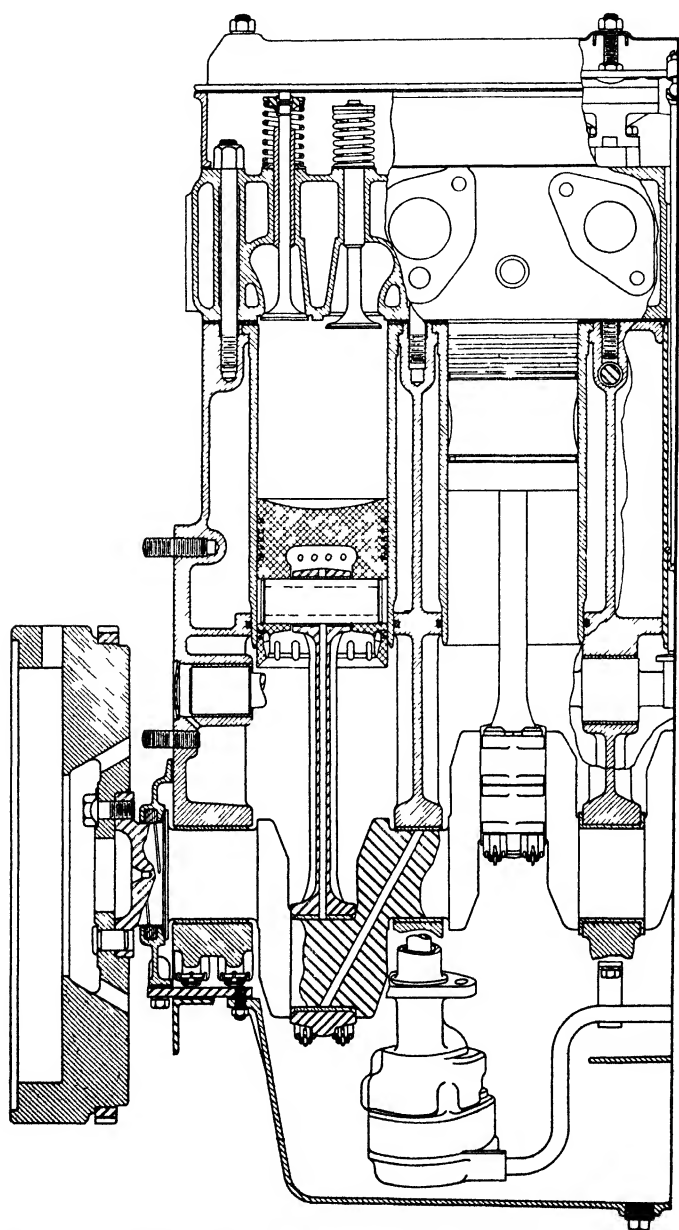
A.—LONGITUDINAL SECTION OF I.H.C. ENGINE, REAR HALF.
